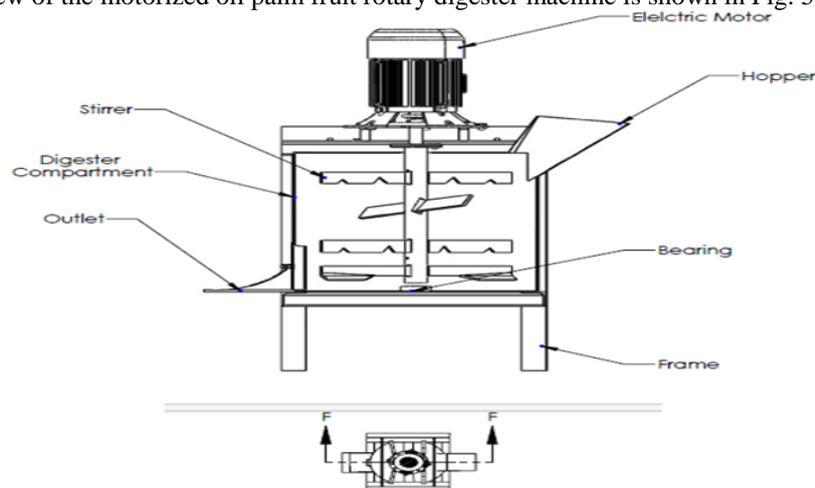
Sectional view of the motorized oil palm fruit rotary digester machine
